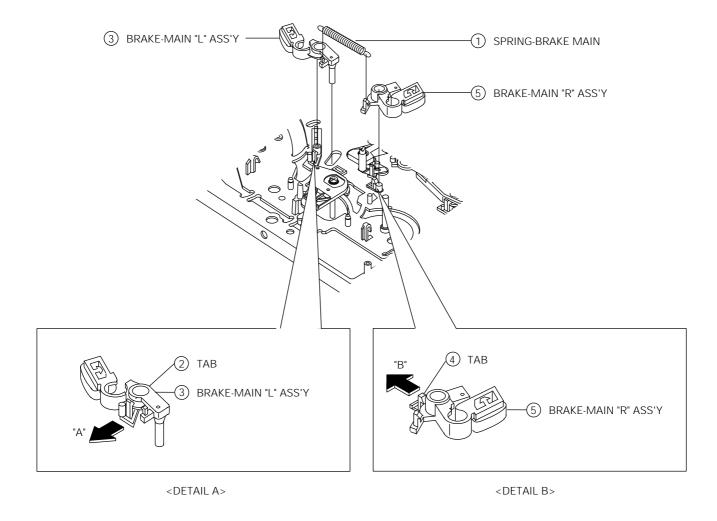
Brake Main "L", "R" Ass'y Removal
